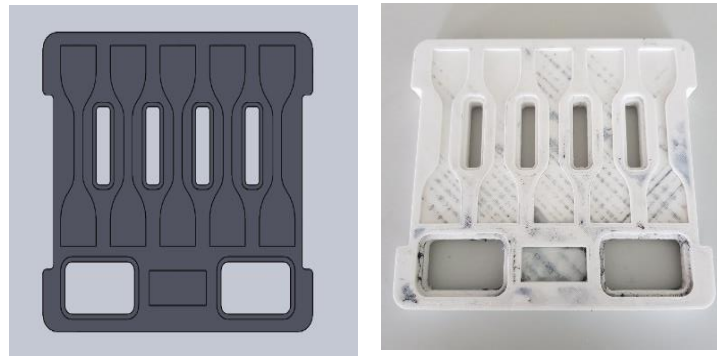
(a) SolidWorks mould design; (b) PETG printed mould
